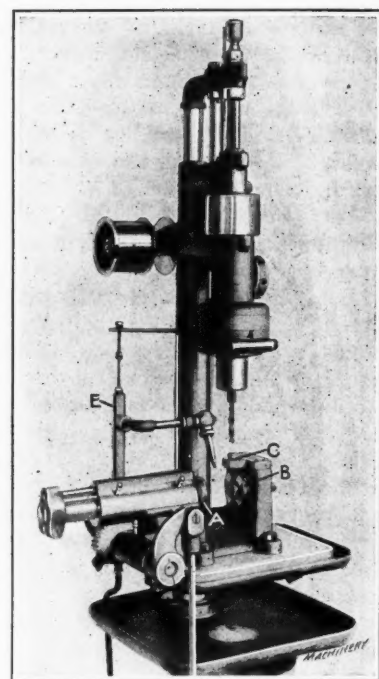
Detail showing Jig Construction for Wrench Holes in Graduated Time Train Ring
